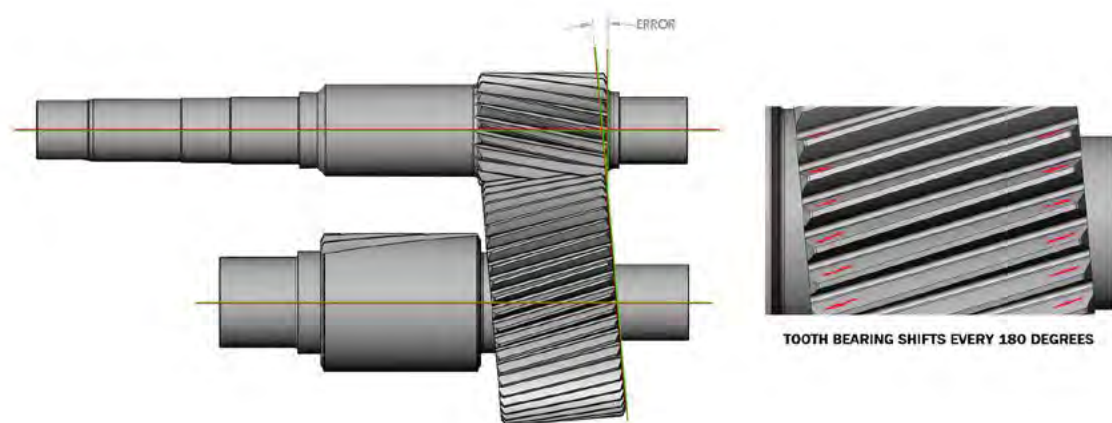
GEAR NOT ROTATING ON TRUE CENTERS
